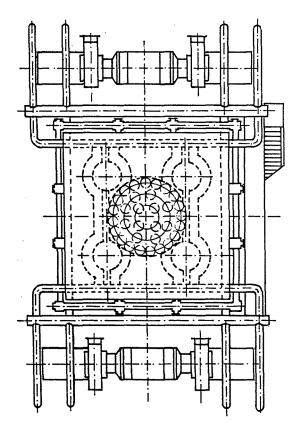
Installation layout for canal burner for boiler type PTVM-100
